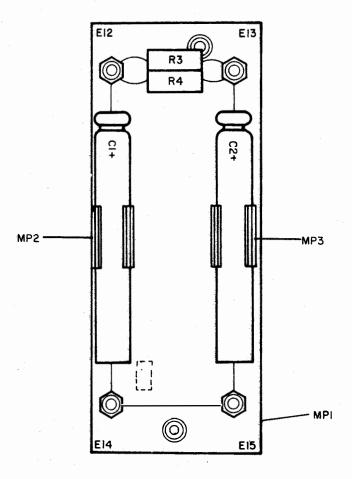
Filter Assembly A2A6A7, Component Locations
